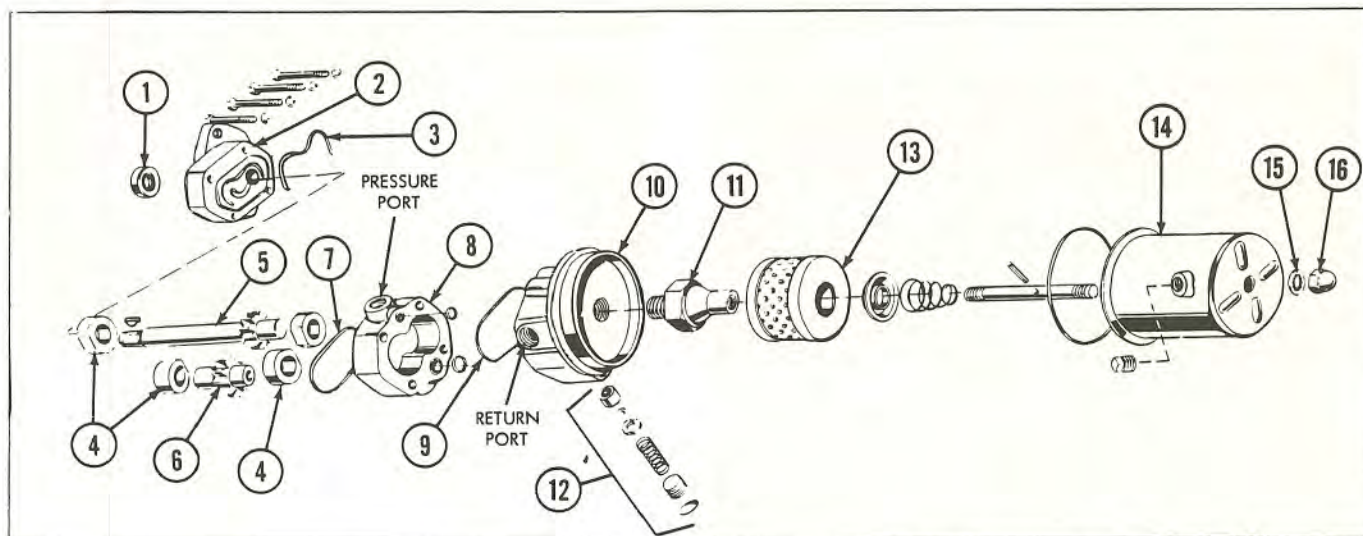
Wooster Power Steering Pump - Identification and Sequence of Parts
